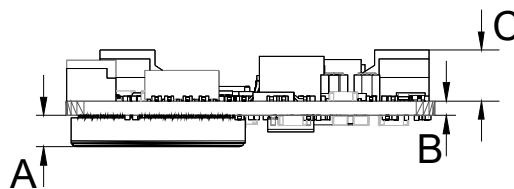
XETK-S21.0 Dimensions - Side View
